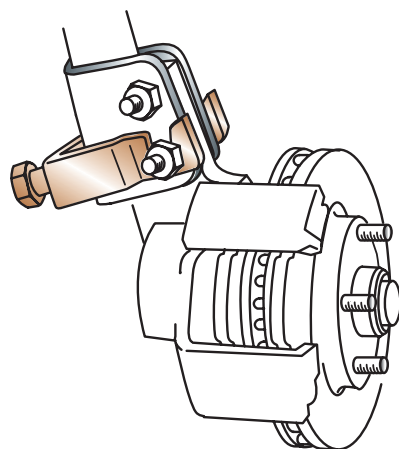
Elongating the lower strut bolt hole provides camber adjustment.
